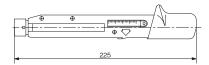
Torque wrench Types 1300A11 and 1300A39
